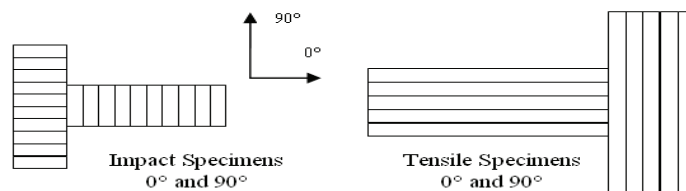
Test Specimen Layout on Flat Panel (not to scale)
